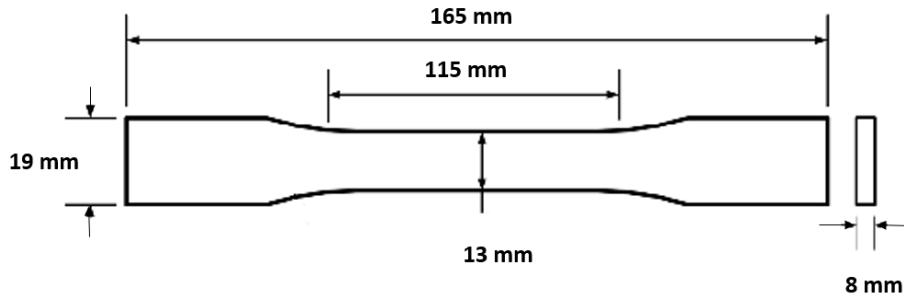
Sample geometry for tensile test of FDM printed parts [56]
